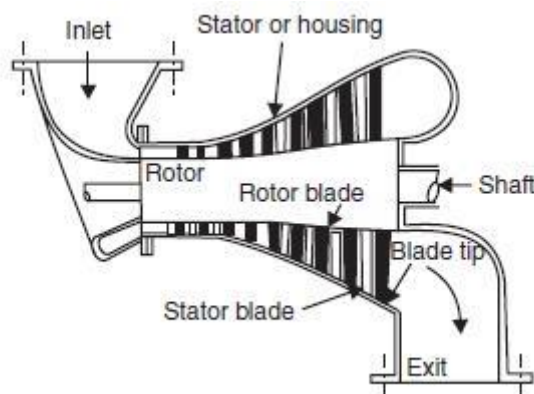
Schematic cross-sectional view of a turbine showing the principal parts of the turbomachine.
